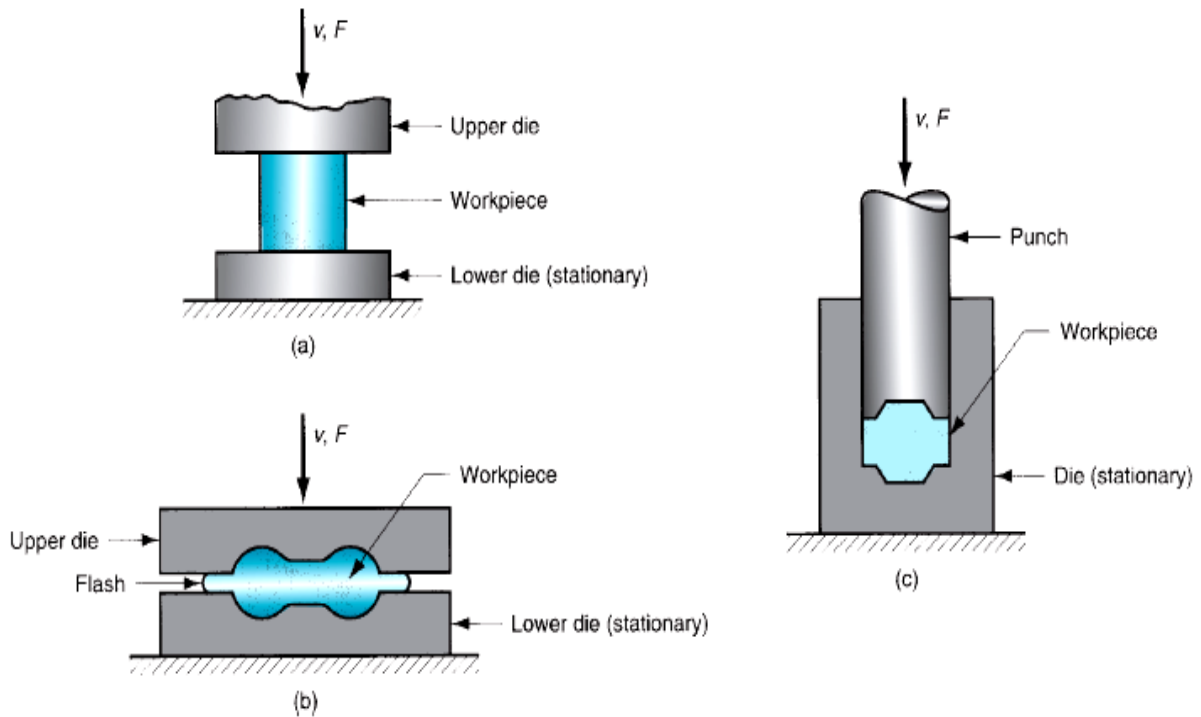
Three types of forging operation illustrated by cross-sectional sketches: (a) open-die forging, (b) impression-die forging, and (c) flashless forging.
